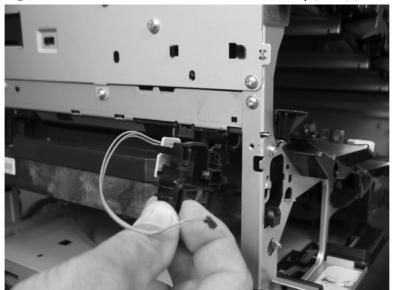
Remove the laser/scanner assembly (Y/M) (10 of 12)
